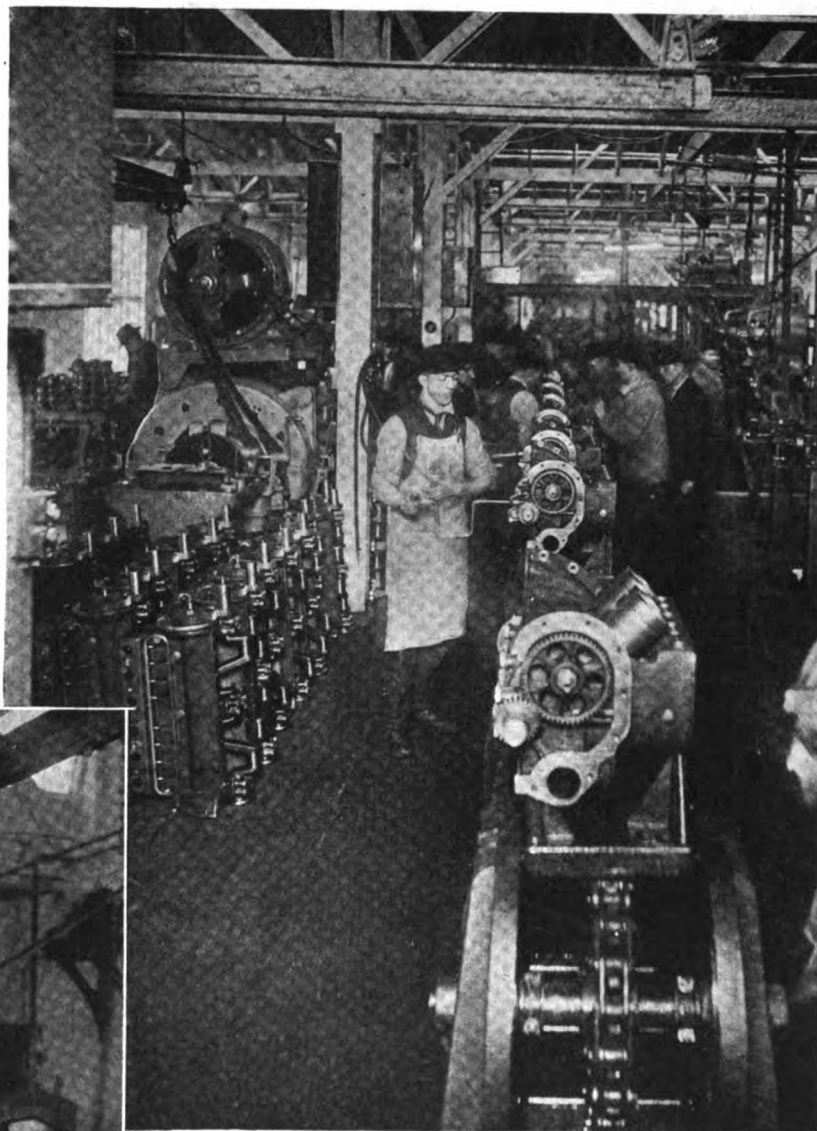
The second length of the cylinder block assembly chain, showing pistons put loosely on top of block
